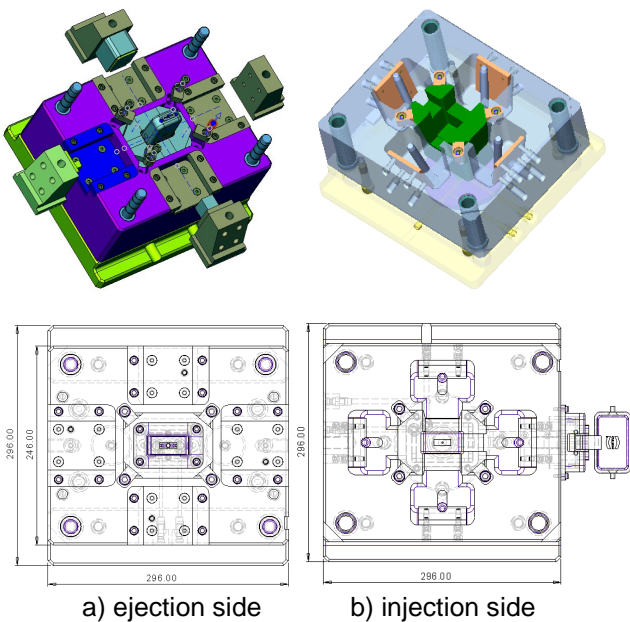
Standard Hybrid mould design a) ejection side b) injection side
